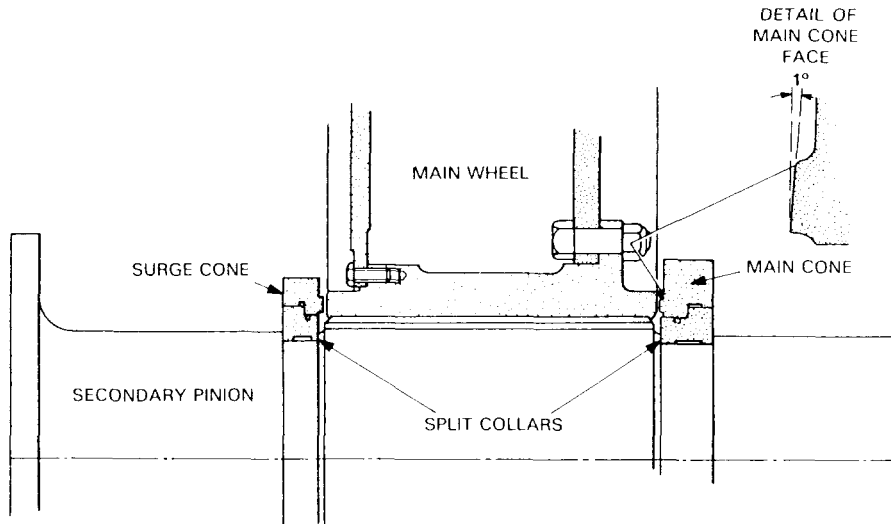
ARRANGEMENT OF SECONDARY GEAR THRUST CONES
